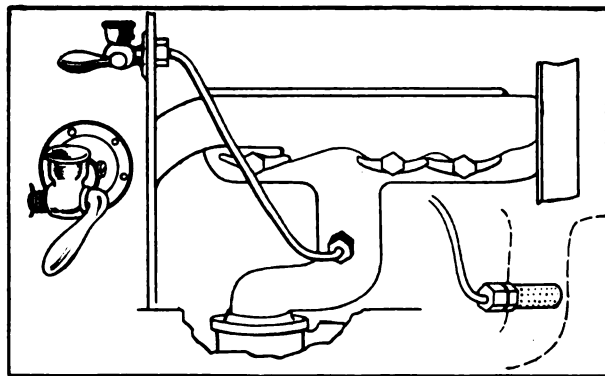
Dash Priming Device for Ford Motor—The Fuel Is Broken Up by the Use of Perforated Tube Within the Intake Manifold.
